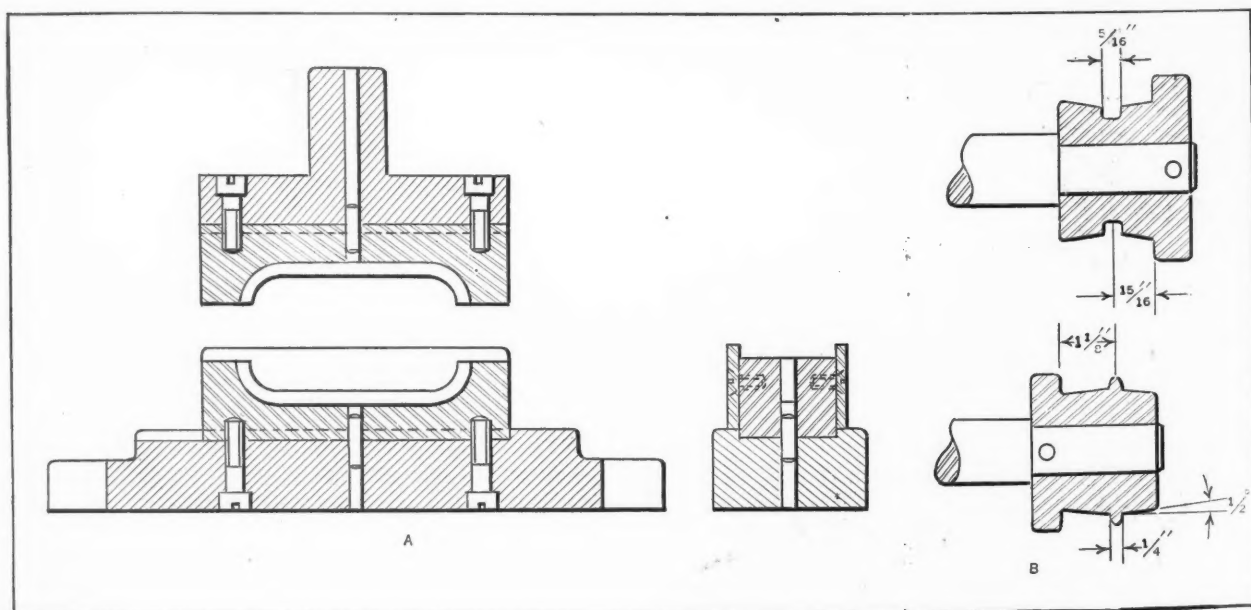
(A) Oval Forming Die Replaced by Die Shown at A, Fig. 3; (B) Beading Rolls for First Operation on Jacket
